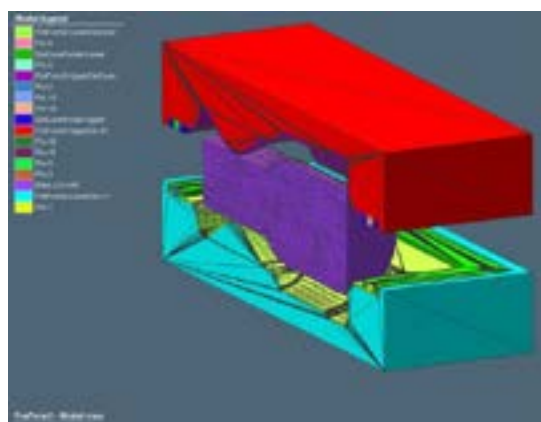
(a) CMM measurements for die surface. (a) Pre-Form geometry; (b) Final form geometry.
